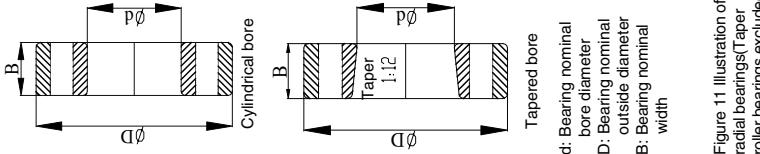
Illustration of radial bearings(Taper roller bearings excluded)
